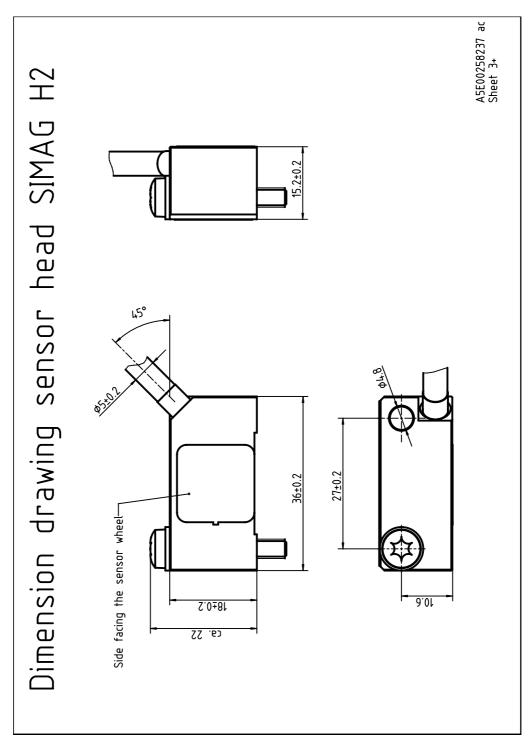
SIMAG H2 dimension drawing, sensor head
